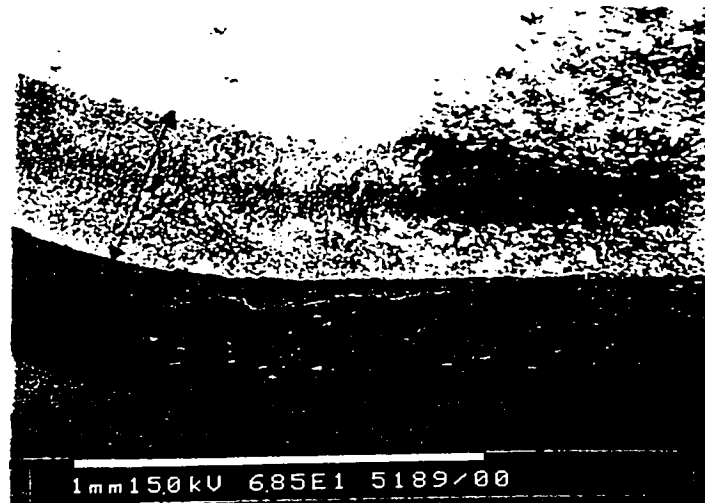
Measurement of the Tool/Chip Contact length.
